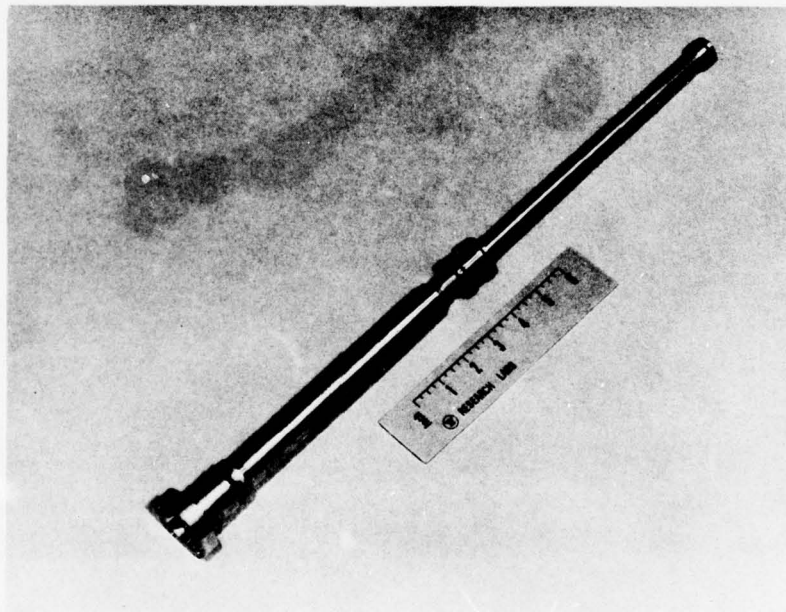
Coolant cross-over tube, which is inserted into the rotor bore to provide controlled coolant flow to the rotor.
